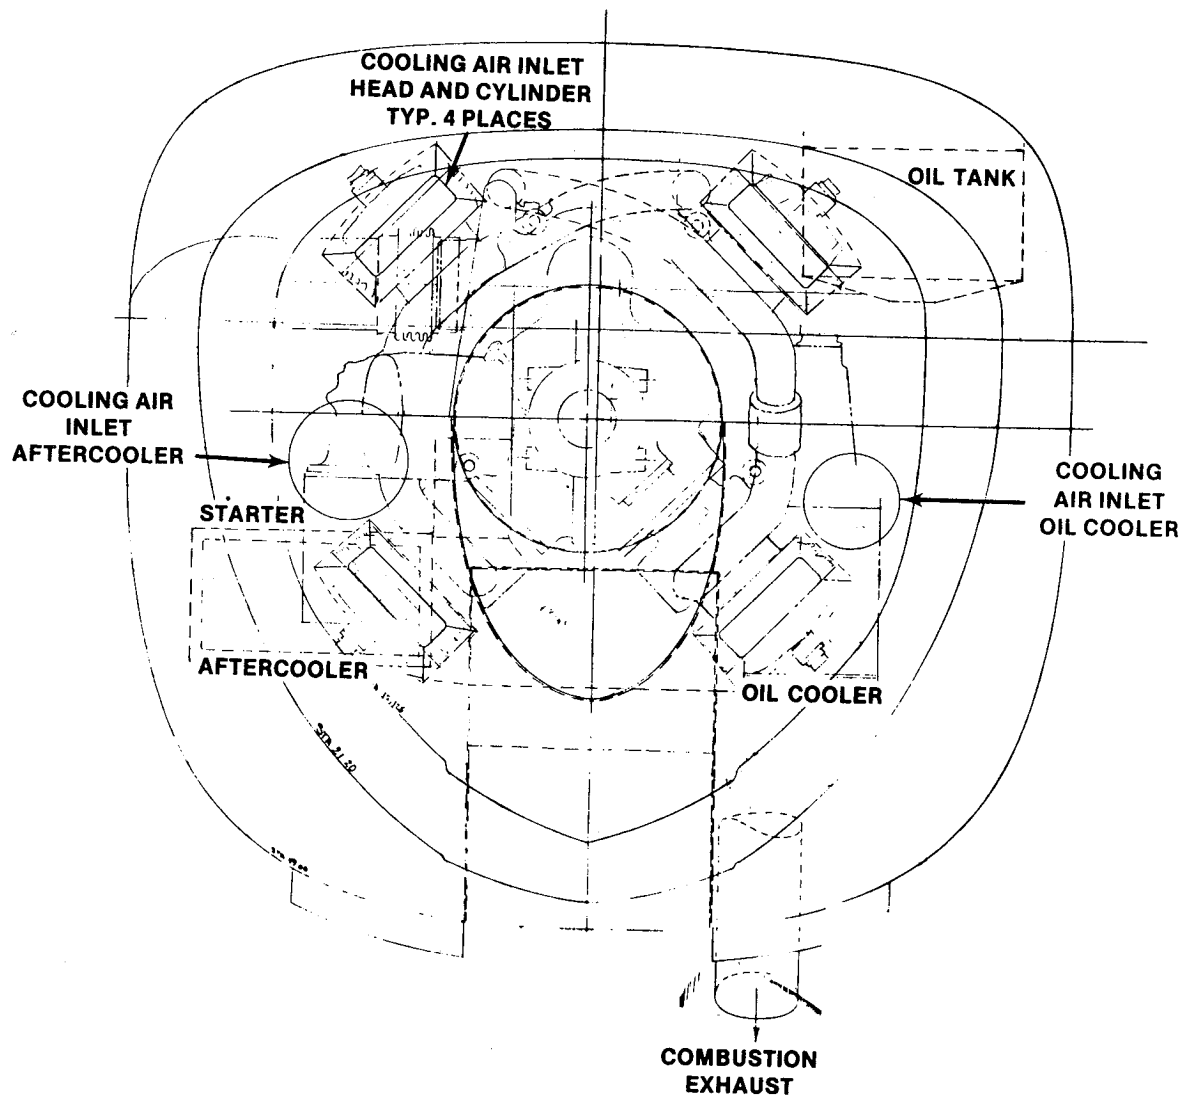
FRONT VIEW SINGLE INSTALLATION
